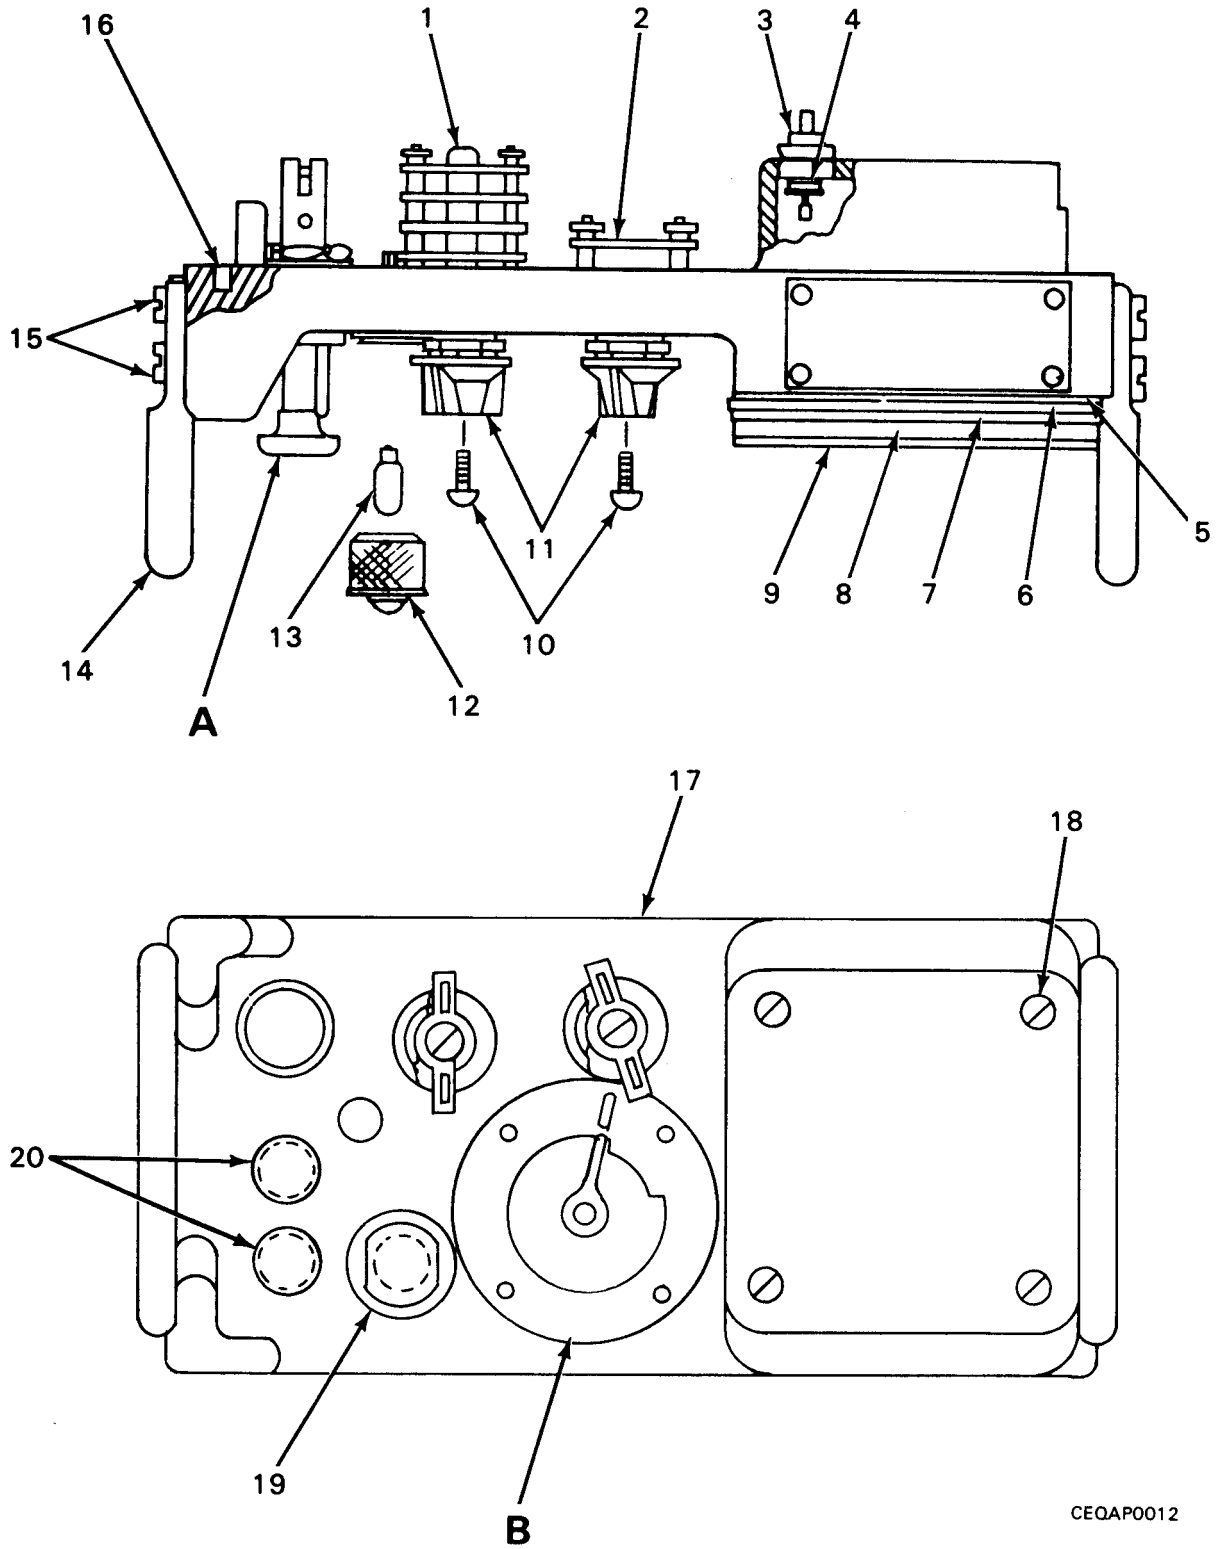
Panel Assembly (AN/GRA-39A, B, and C) (Sheet 1 of 2)
